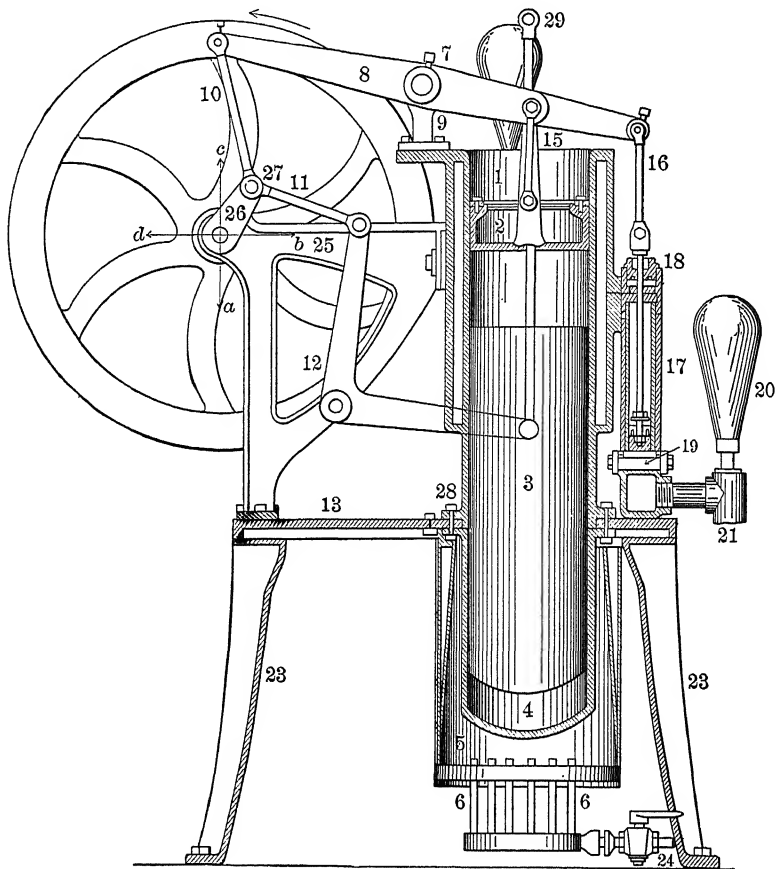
ERICSSON HOT-AIR ENGINE.
